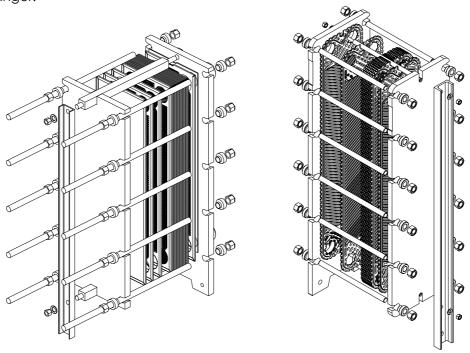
(Assembling of a TECHNO SYSTEM plate heat exchanger)
